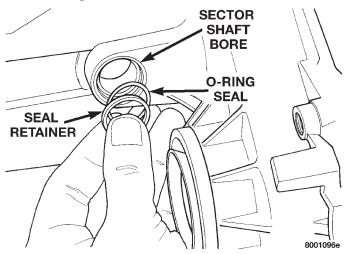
Sector Shaft Seal And Retainer Removal INPUT GEAR/PLANETARY CARRIER REMOVAL AND DISASSEMBLY
